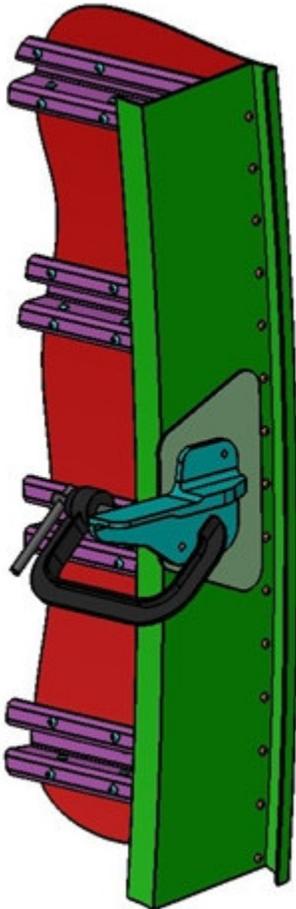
Traditional: A part with pilot holes is clamped into position, not single-sided fastening
